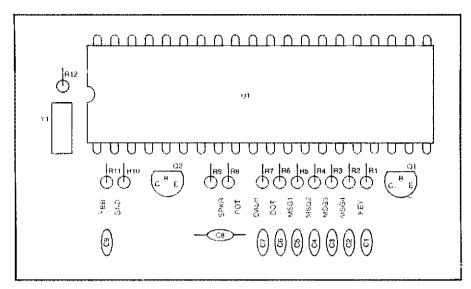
Part-placement guide for the CMOS Super Keyer II. Parts are placed on the nonfoil side of the board; the shaded area represents an X-ray view of the copper pattern.
